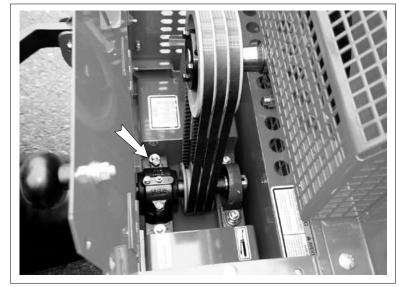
INPUT SHAFT BEARINGS (Typical)
